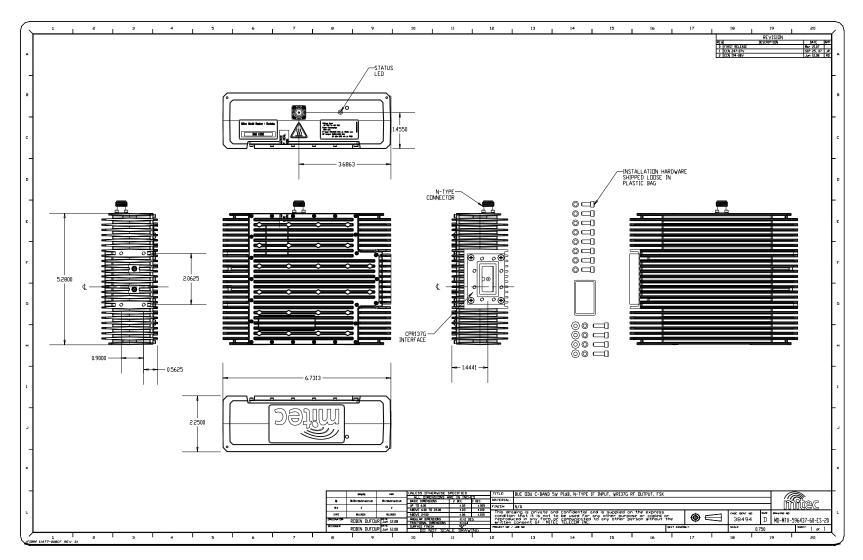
MTX-596x37-60-ES-20 - Outline drawing
